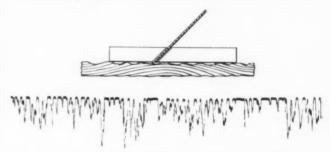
UNIFORM REMOVAL OF STOCK BY HONING
